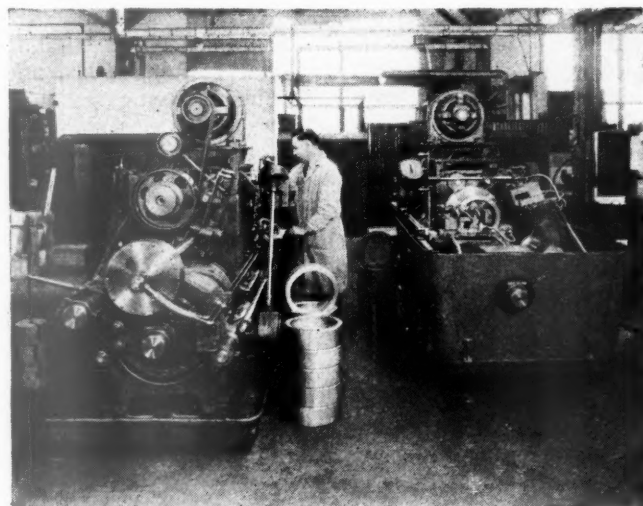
Two 24-in. Fay automatic lathes in which the work is chucked
